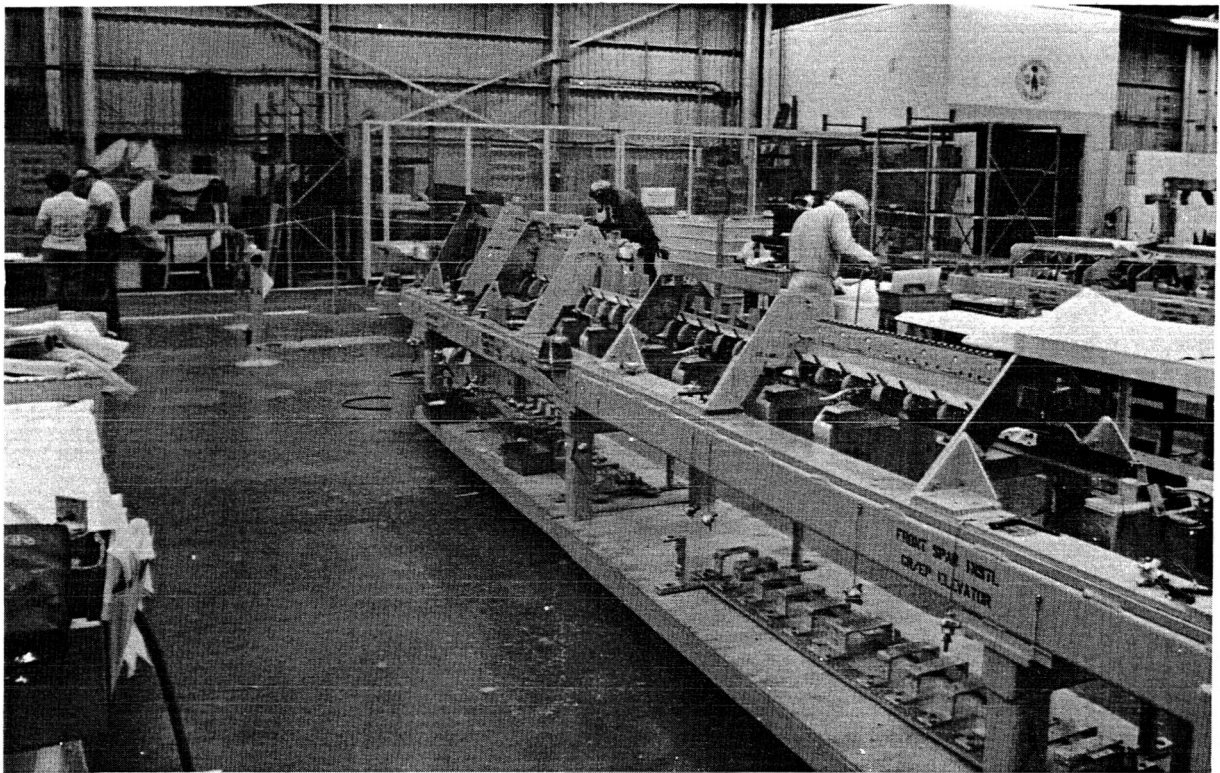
Front Spar/Leading-Edge Assembly Buildup
